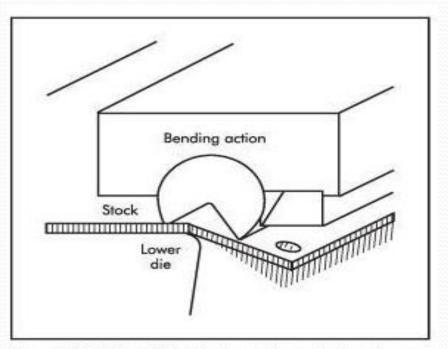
A Ready[™] bender bends the stock through rotary action of the circular member. (Courtesy Ready Tools, Inc.)
